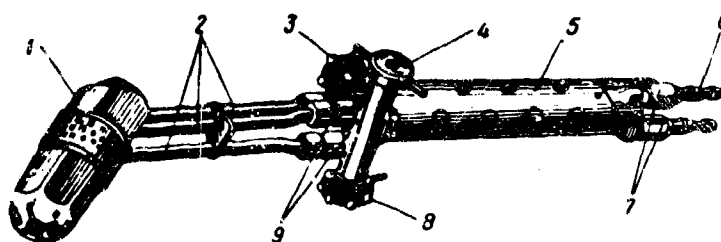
Gasoline Cutter of the BUPR Installation: 1 - head; 2 - connecting tubes; 3 - gasoline supply valve; 4 - feed valve to cutting oxygen; 5 - casing of cutter (handle); 7 - sleeve fitted with adapters 6 for connecting the hoses; 8 - valve for providing the heating oxygen; 9 - intermediate pieces for connecting the head with the cutter frame.
